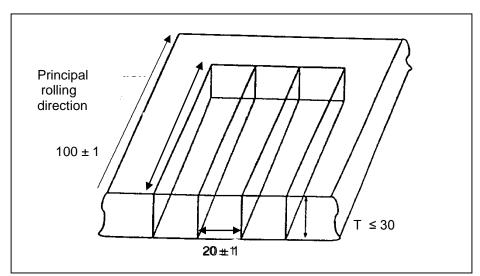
Test Specimen Location for Plates up to 30 mm (1.2 in) Thick, Inclusive (All Dimensions in mm [1 in = 25.4 mm])
